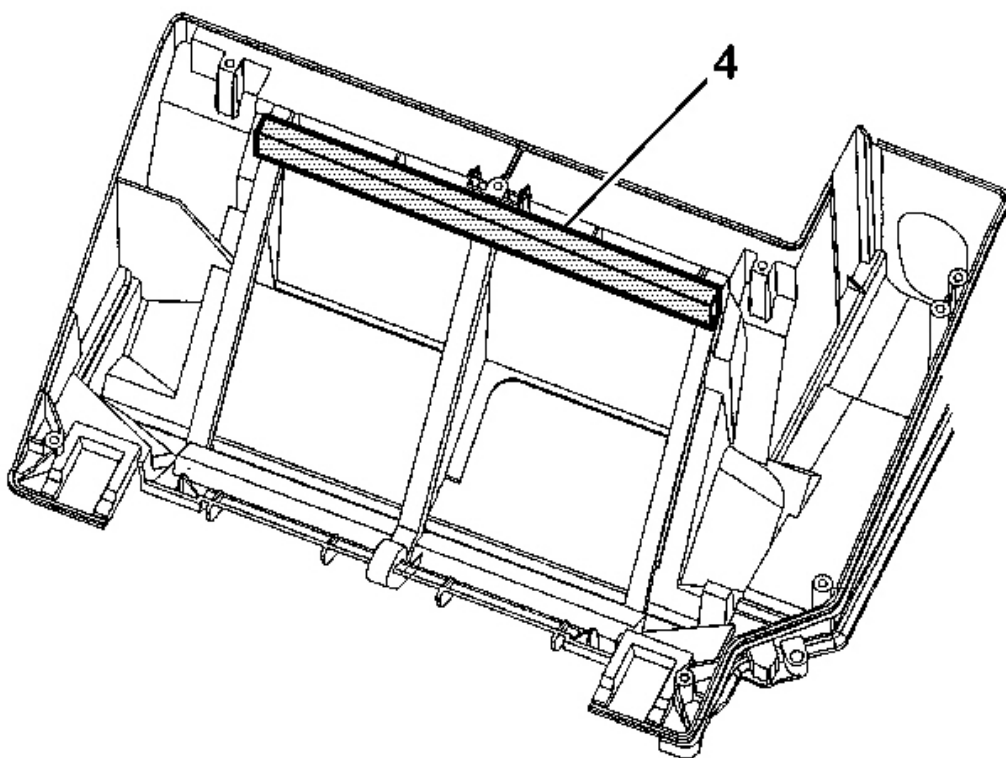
Lower HVAC Module Case & Heater Core Lower Seal
